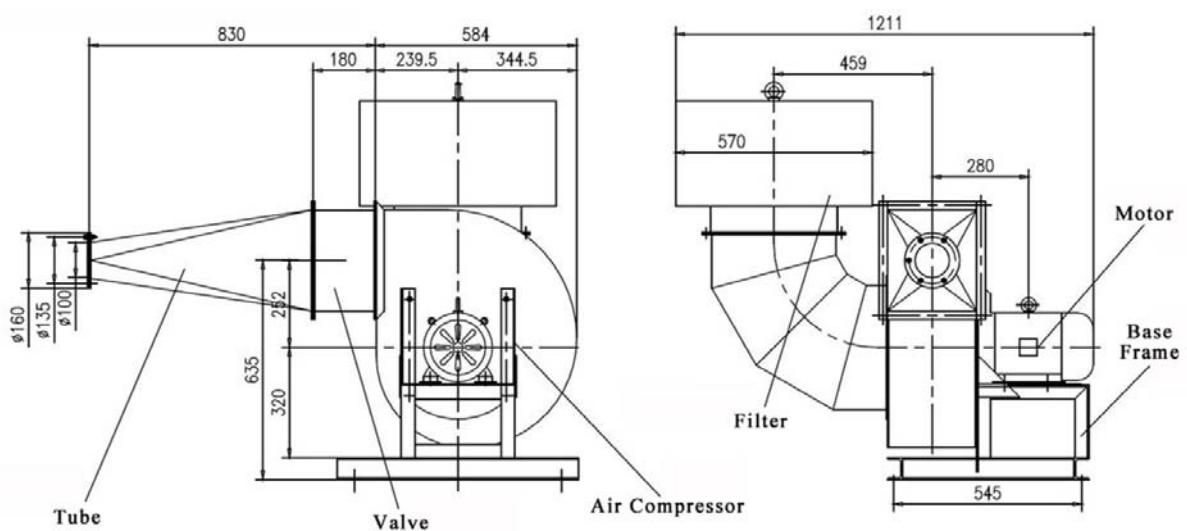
Structure of the Fan Assembly of Gyratory Crusher (PXZ-1500II)
